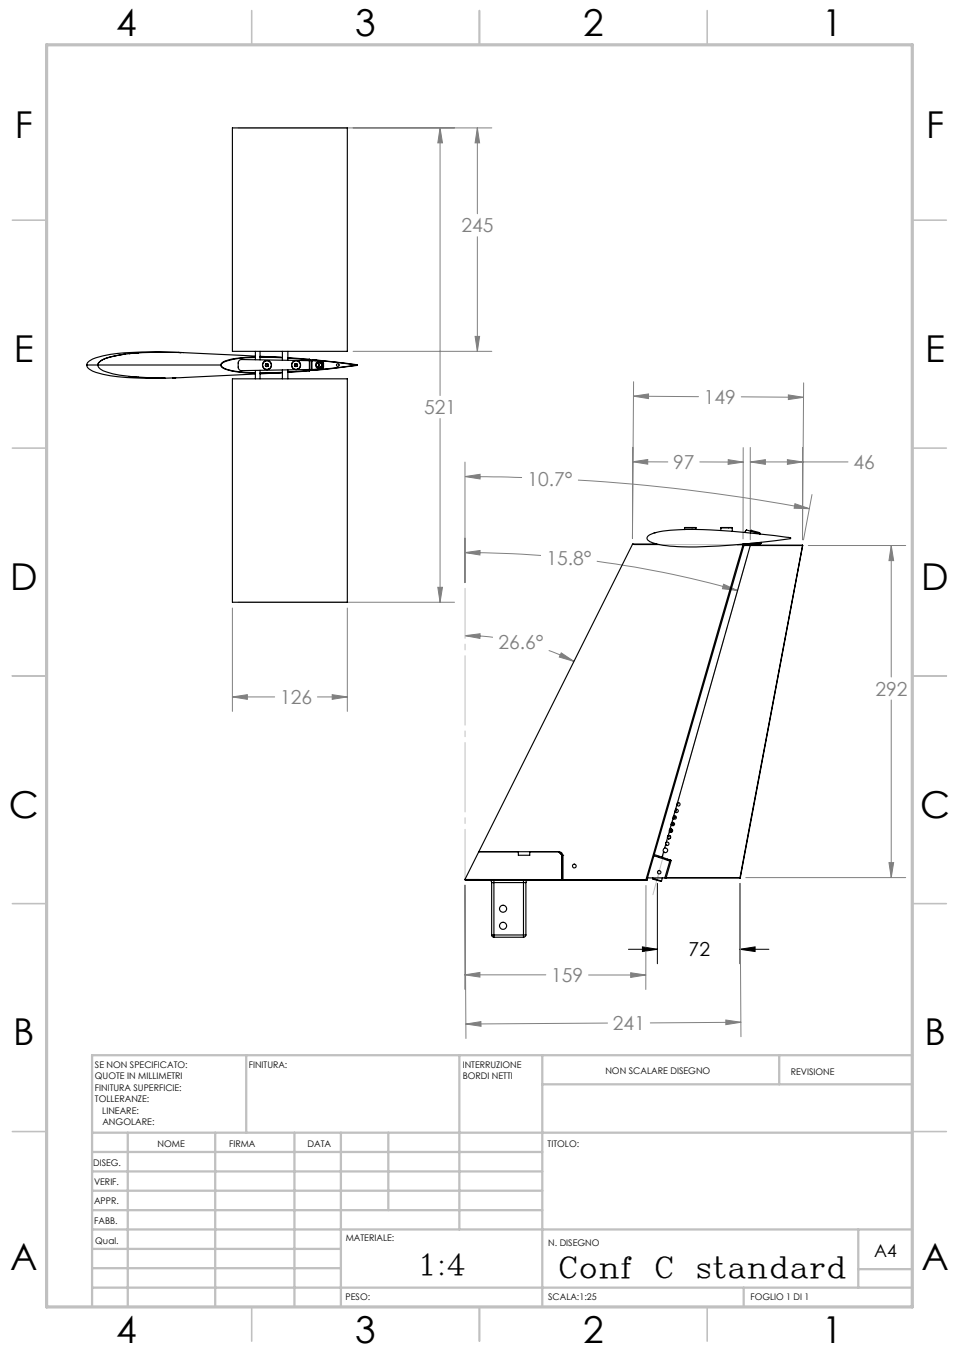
CAD model of tail assembly C with $R = 1.5$.
